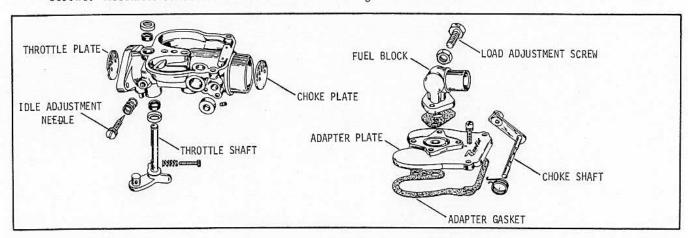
K181 CARBURETOR ADJUSTMENTS
